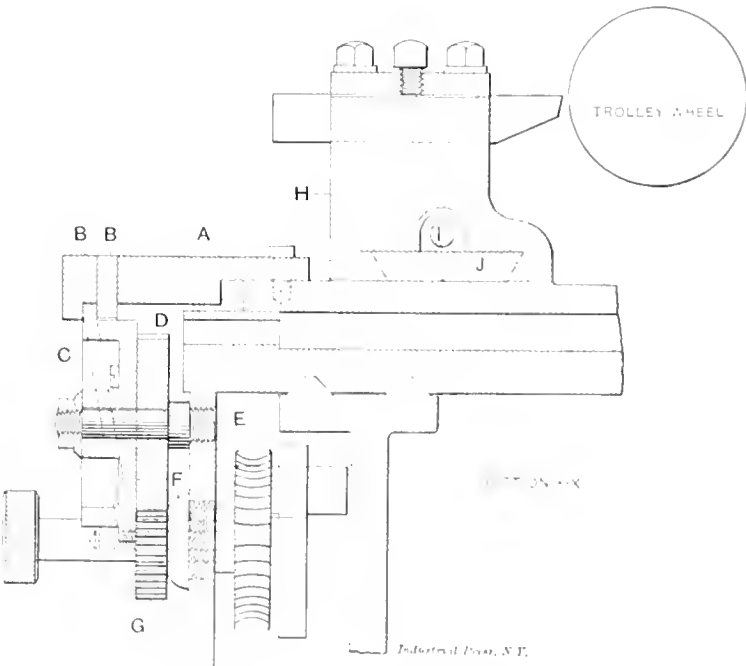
Cross-section of Lathe Carriage and Cam Attachment
